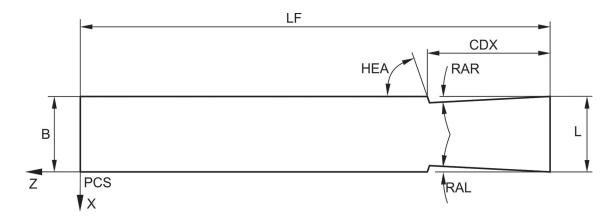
Sketch of turning tool No. 4 (straight grooving design)
